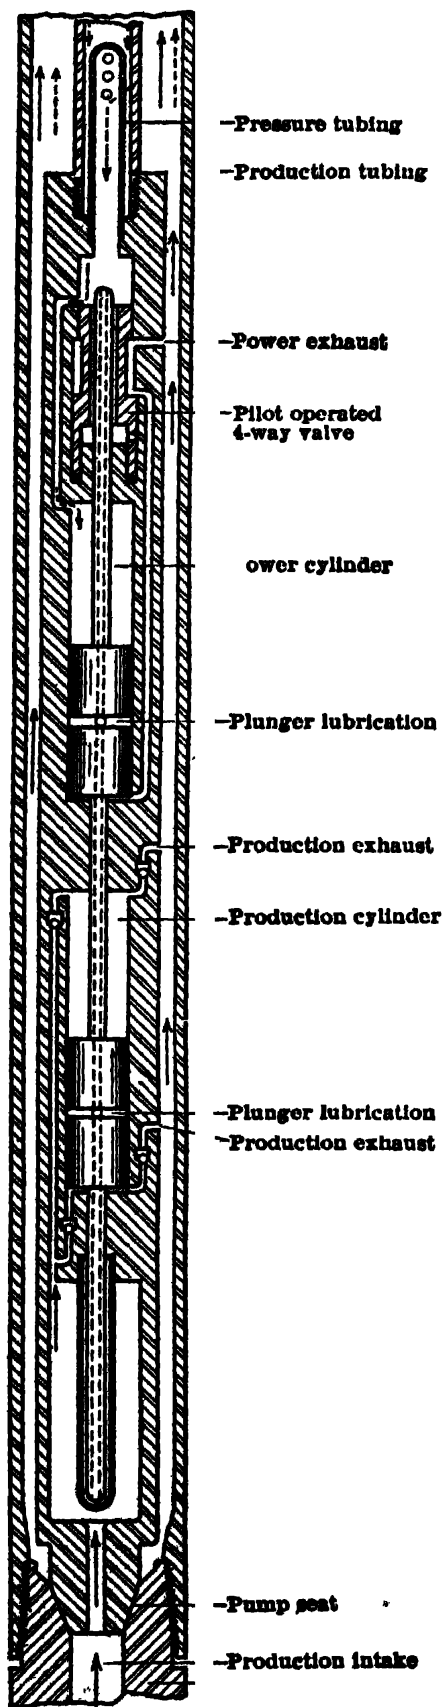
Details of Kobe Hydraulic Pump (see Fig 6)
